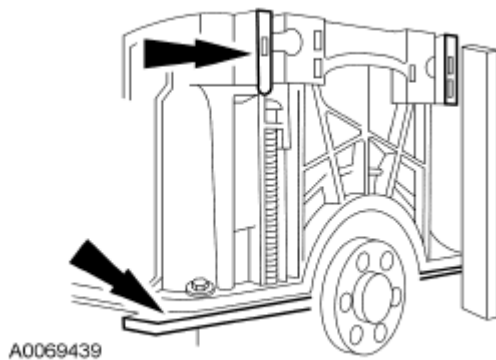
Locating Rear Face Of Cylinder Block And Transmission Face Of Cylinder Block Cradle
